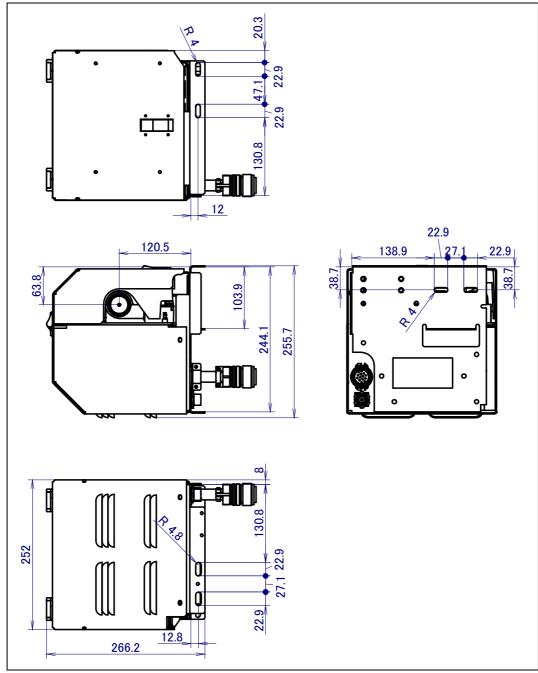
(h) Outer dimensions of wire feeder (Auto drive 4R220)
